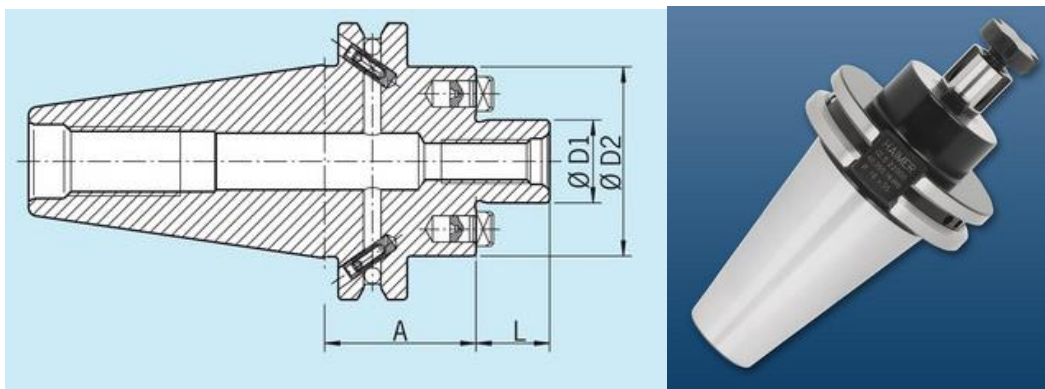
Tool Shanks for Milling Machines (Source: ANSI B5.18-1972)
